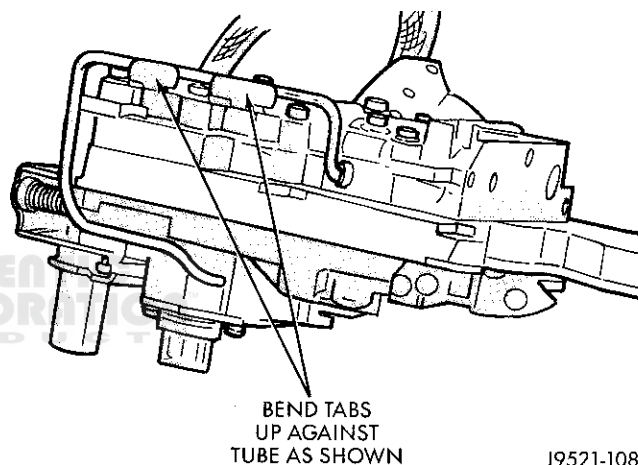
Securing Boost Valve Tube With Brace Tabs
